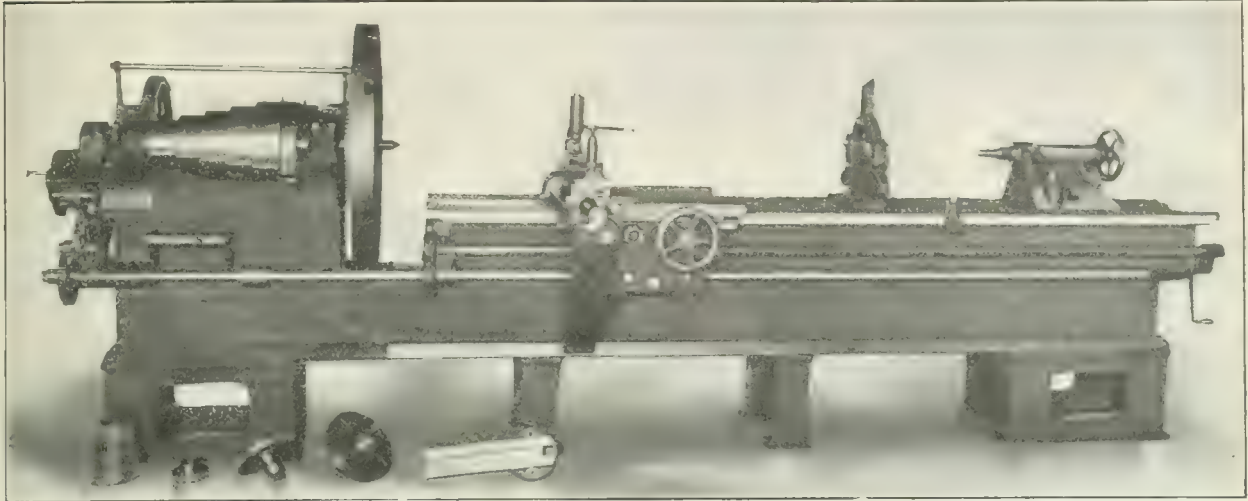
The New Extension Lathe Built by Edwin Harrington, Son & Co., Inc., Philadelphia, Pa.
